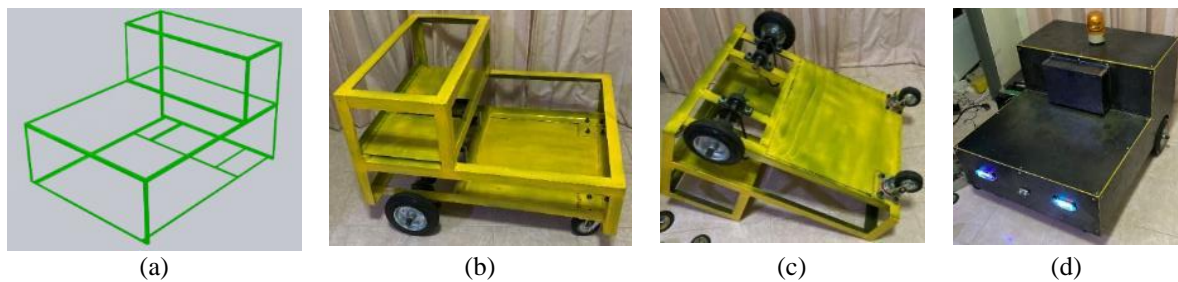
AGV design and implementation: (a) 3D CAD model, (b) top view, (c) bottom view, and (d) AGV final assembly
